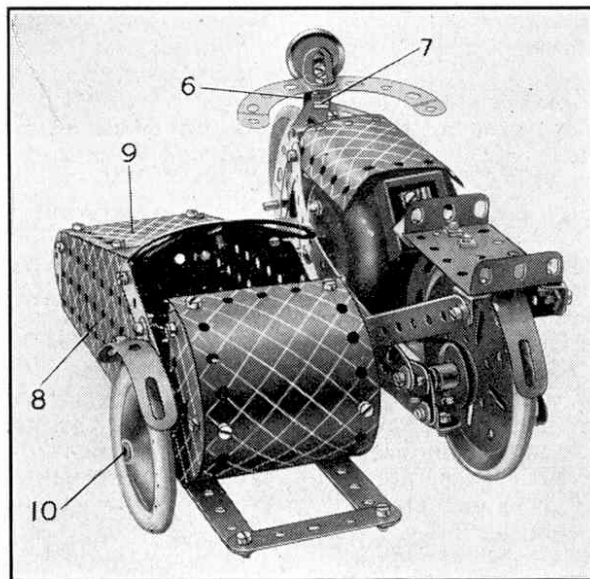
A rear view of the motor-cycle combination, showing details of the drive to the rear wheel and the construction of the side-car.
